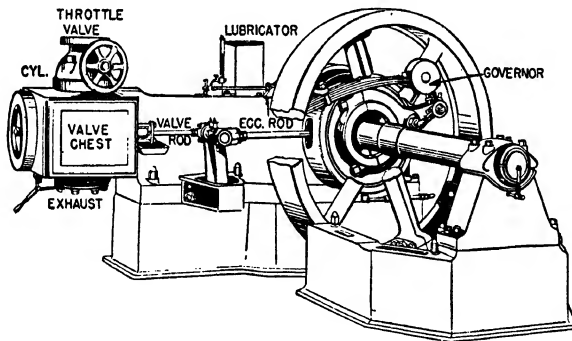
Simple horizontal steam engine. (Courtesy Socony-Vacuum Oil Co.)
